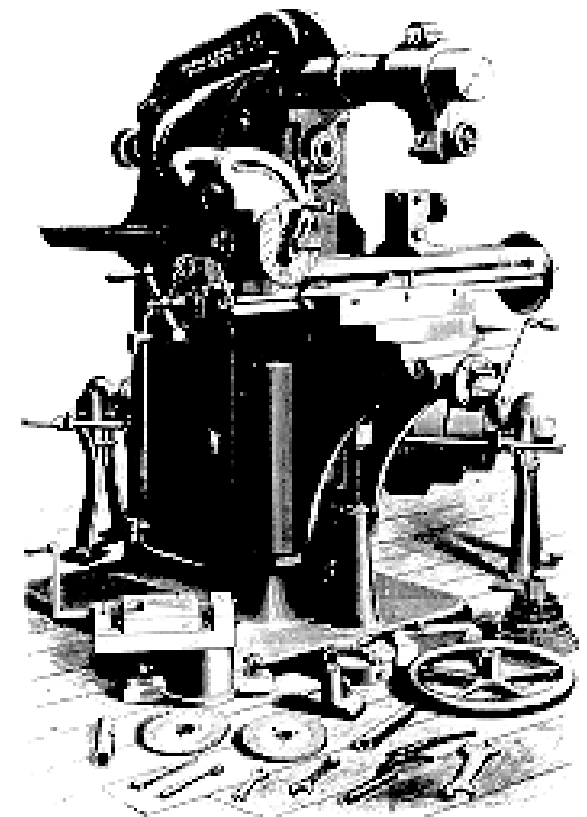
NO. 3 UNIVERSAL MILLING MACHINE
